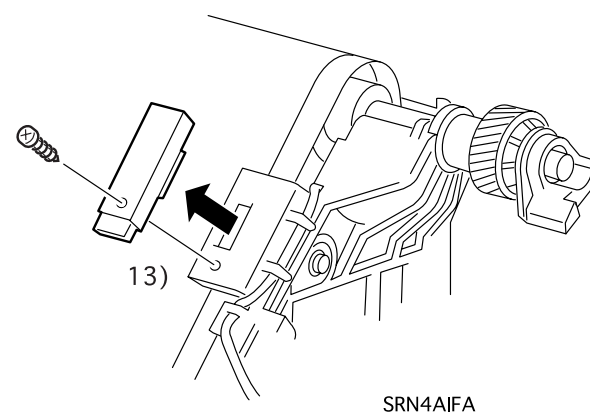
IBT BELT ASSEMBLY Removal (3/3)
